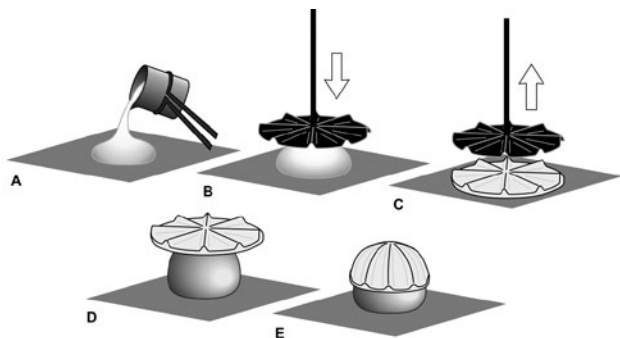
The formation of open-form bowls by sagging glass over convex “former” molds: (A) molten glass is poured onto a flat surface; (B) pressed with a flat, disc-shaped former; (C) cooled to create a glass disc; (D) transferred onto a “former” mold; (E) heated to cause the disc to sag over the mold giving the final bowl shape [adapted from reference 42 with permission from Springer Nature].
